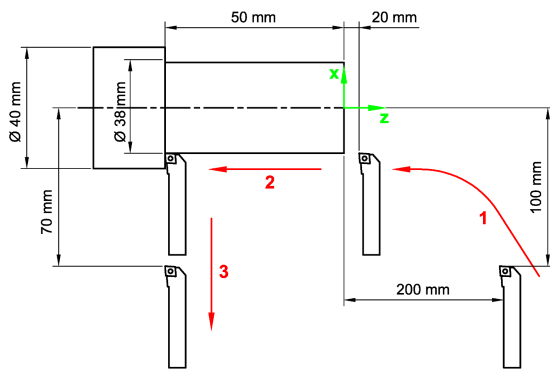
Sketch with workpiece and cutting tool of the second simulation scenario
